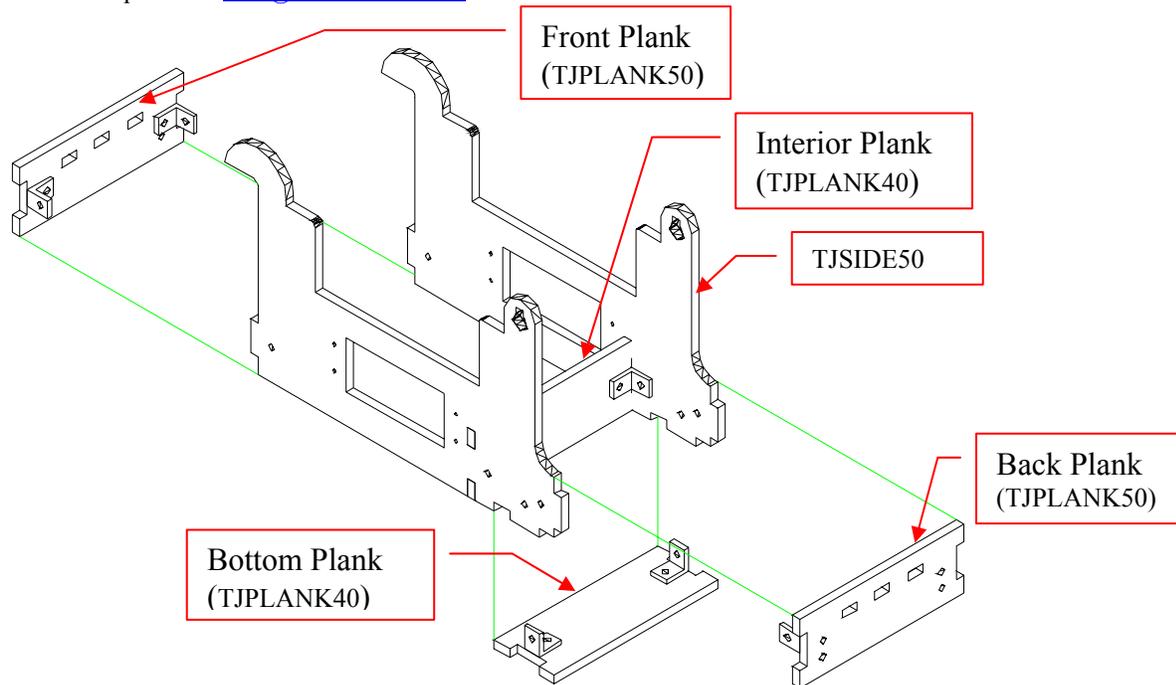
This drawing of the TJ-AVR™ frame assembly shows how to connect the four cross planks to the sides. For clarity, the servos are not shown mounted. The long side of each angle bracket lies on the crosspiece. The short side of the angle bracket connects to the side pieces of the body with $\frac{1}{4}$ inch 4/40 machine screws. The screw heads show on the outside.
